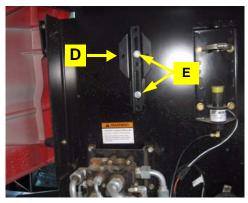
Installed steering block mounting bracket (new drilled holes if necessary)
